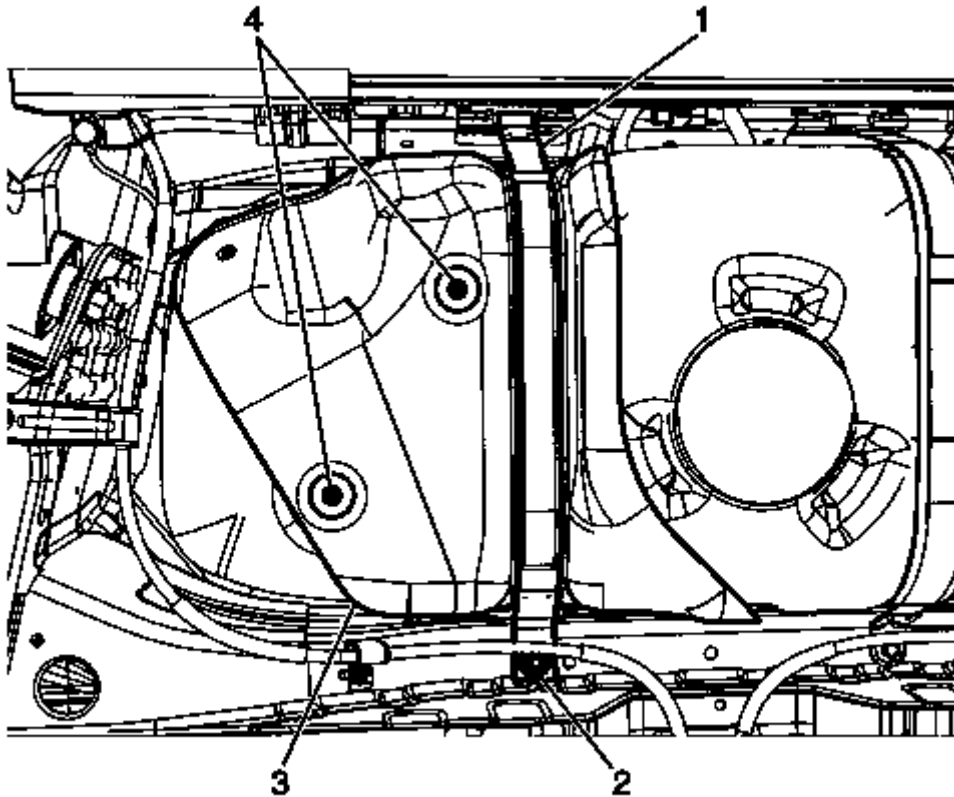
Fuel Tank Strap Retaining Bolt And Band
